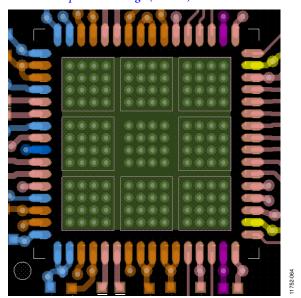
Recommended PCB Layout of Exposed Pad for the AD9680
